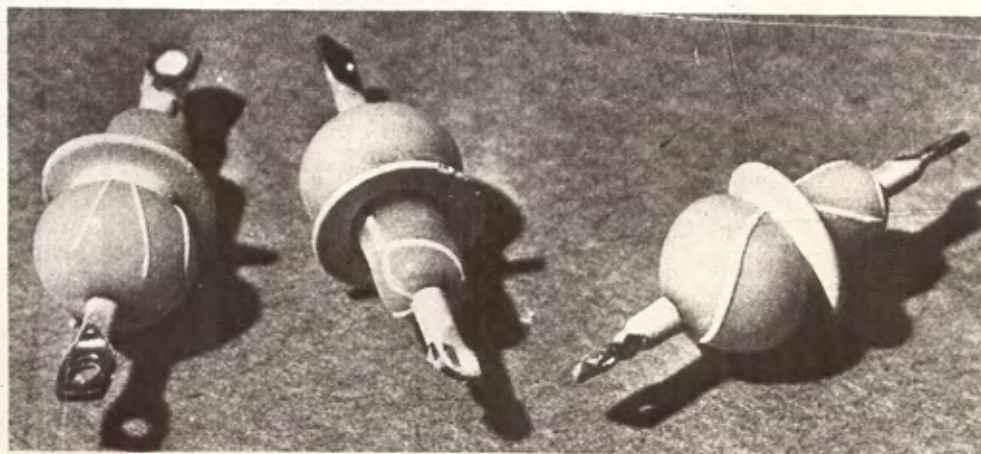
Statiflux Indications of Cracks in Typical Glass-to-Metal Bushings (about $\frac{1}{2}$ -in. in length) Used in Electronic Equipment. (Seals cracked by improper soldering procedures.) (Courtesy Magnaflux Corp., Chicago, Ill.)
